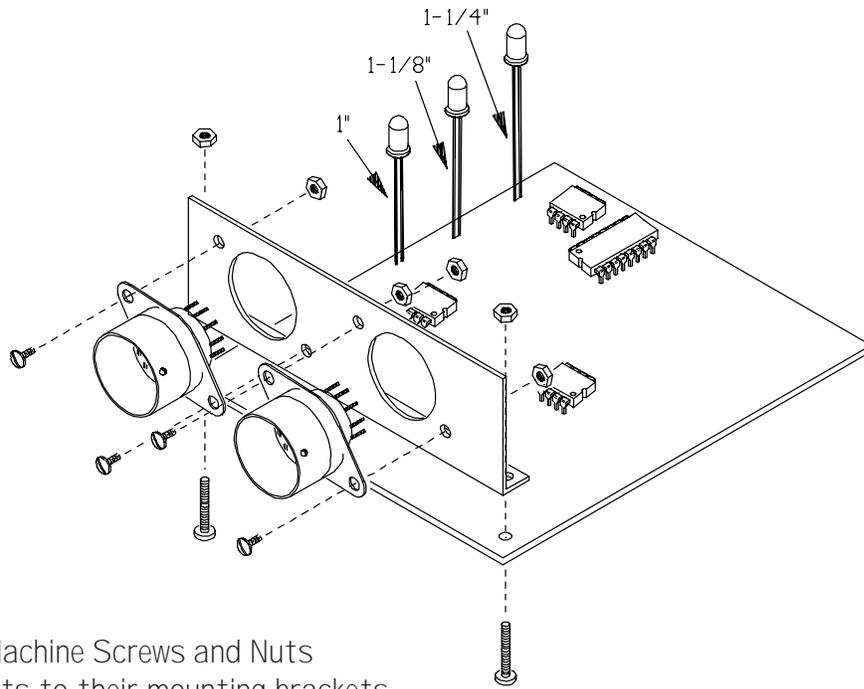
Four #4 X 1/4" Machine Screws and Nuts attach the tube sockets to their mounting brackets. After wires from the tube sockets to the circuit board are in place, the bracket is temporarily screwed to the circuit board with the same #4 X 1/2" screws and nuts which will later hold the assembly in the case.
